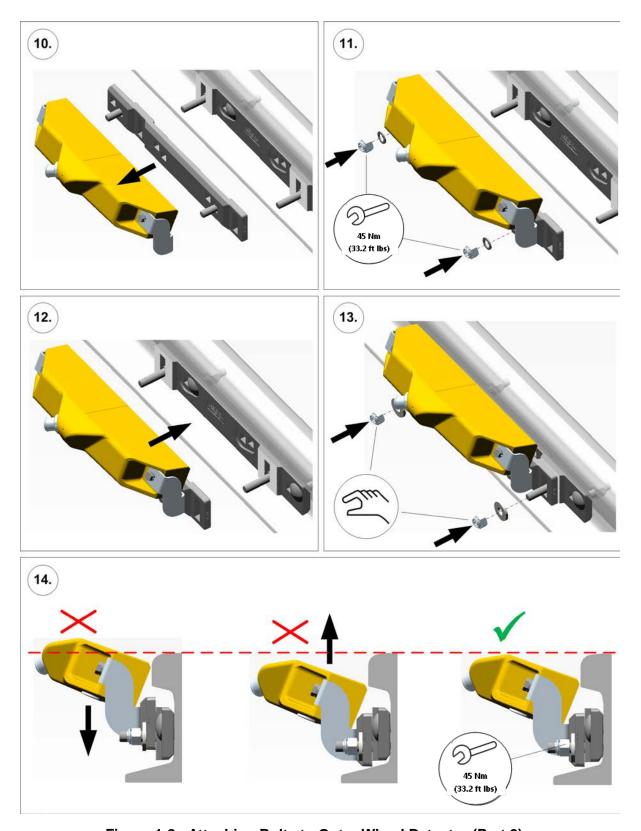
Attaching Bolts to Outer Wheel Detector (Part 2)
